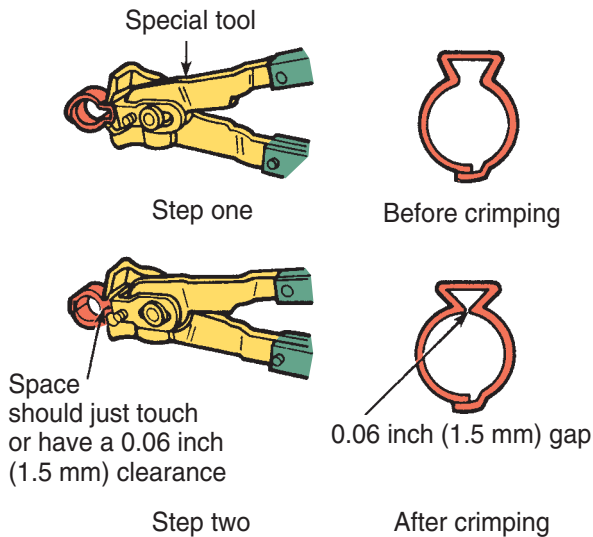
A special tool is required to tighten crimp clamps.
